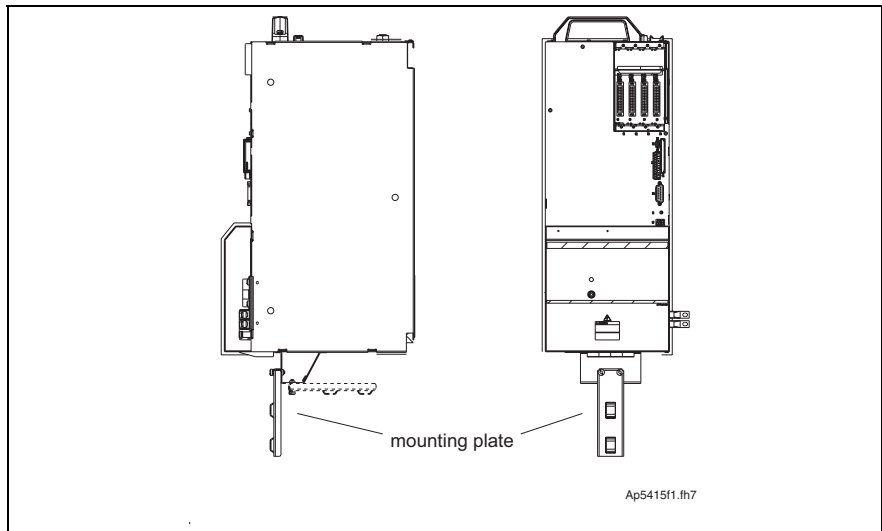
Mounting plate for cable cross-sections greater than 25 mm²
